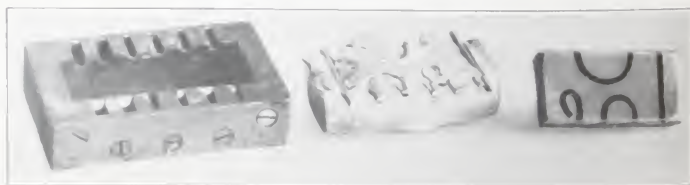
Mold Used in Casting Mounts With Molten Zinc. Mount Before and After Sectioning and Polishing.
